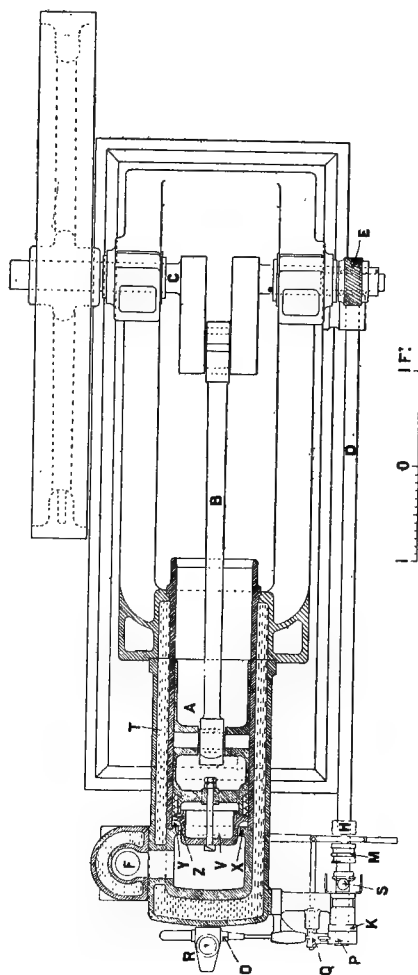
Crossley Otto Engine, 9 HP Nominal (plan part in section)
